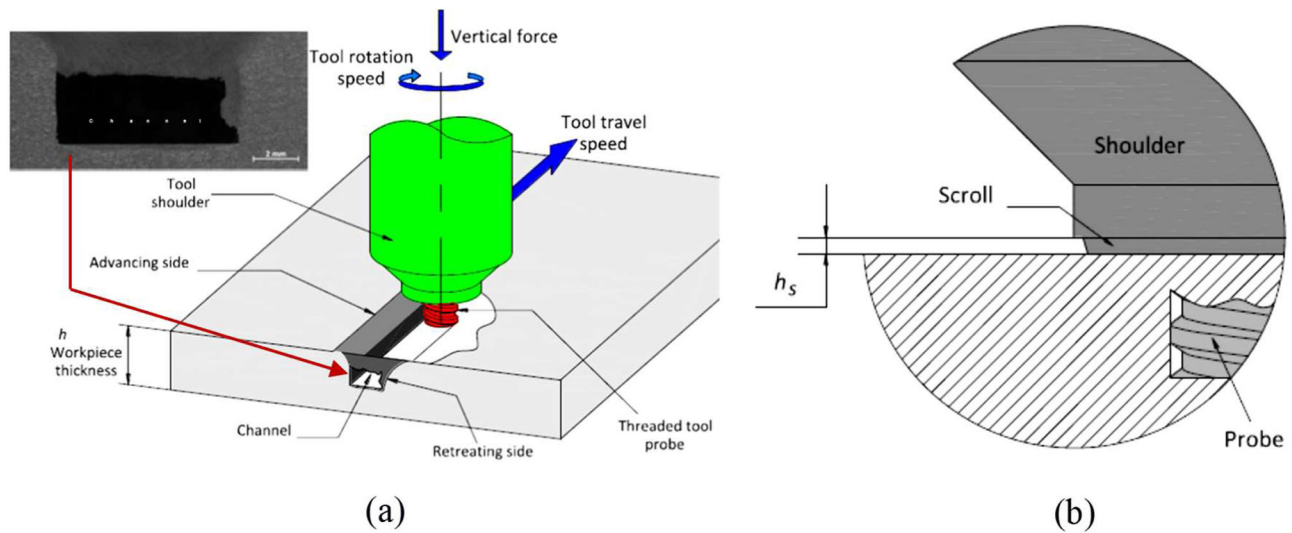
Friction stir channeling without shoulder-workpiece clearance (a) process description^[43] and (b) scroll feature of the shoulder making contact with the workpiece surface.^[44]
